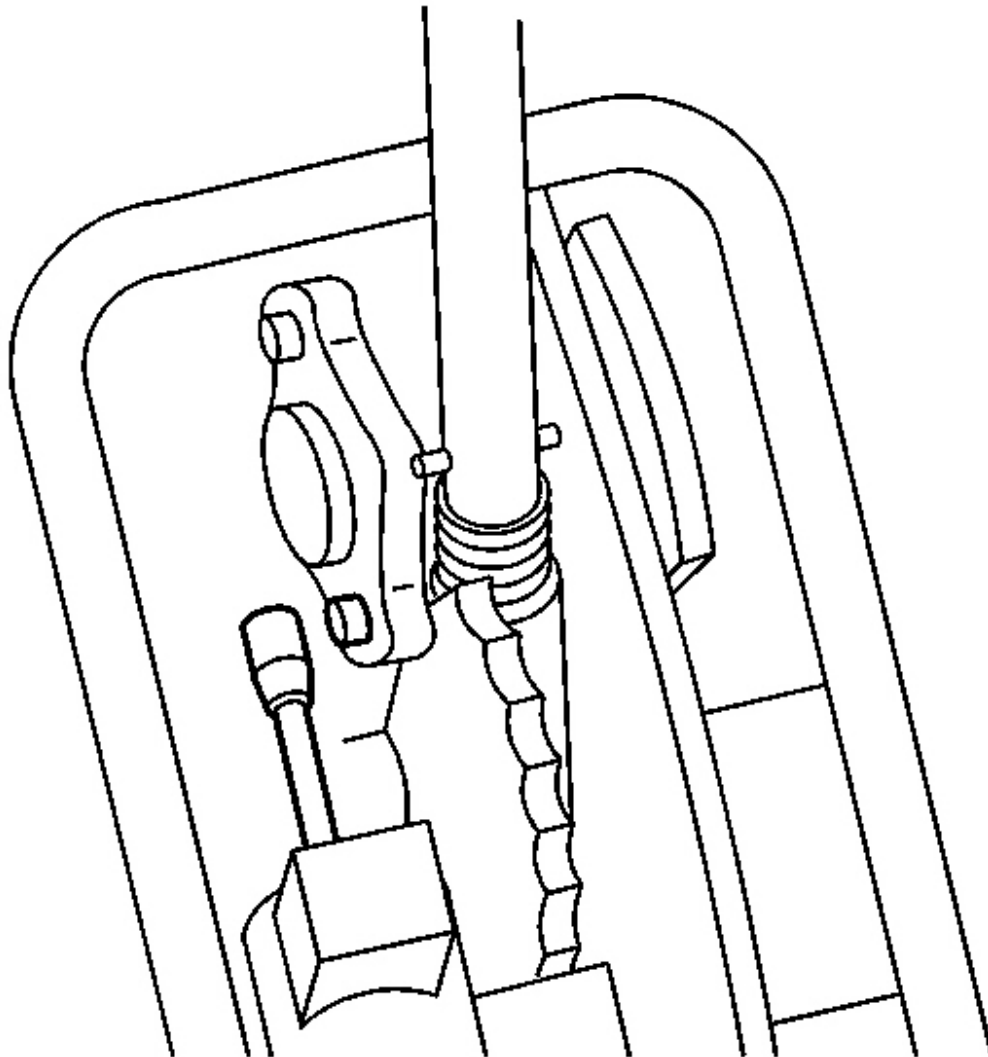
Automatic Transmission Shift Lock Actuator Lower Clip
